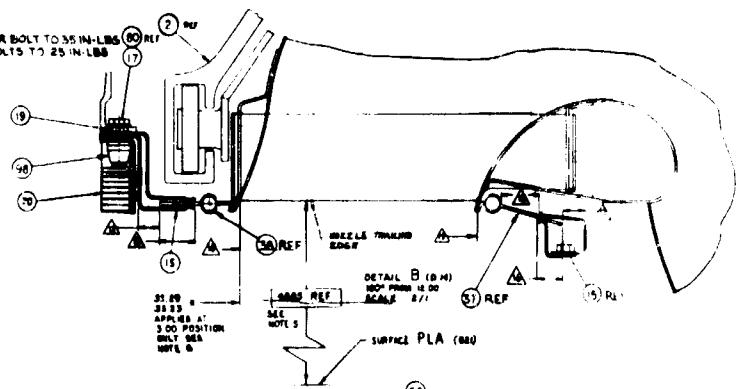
LF2 Fan Assembly (Drawing 4013007-300).
